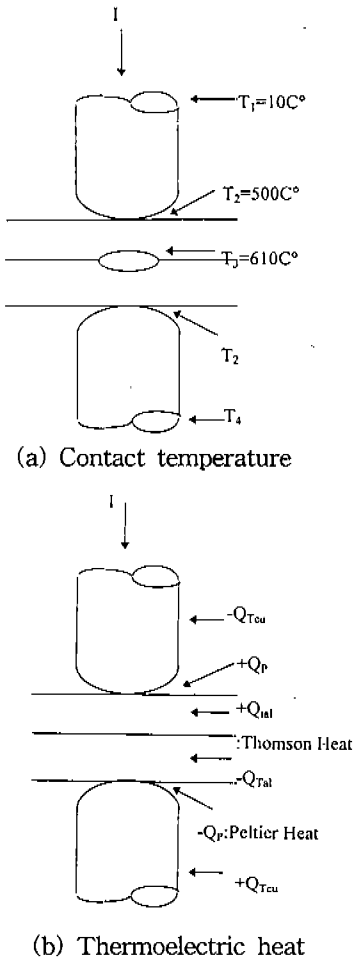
Generation of thermoelectric heat in spot welding process of aluminium alloy
